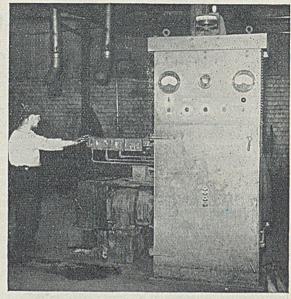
End View of the Casting Machine. Operation is by Automatic Cycle initiated by Push-button Control after Charging the Die with Molten Metal.
